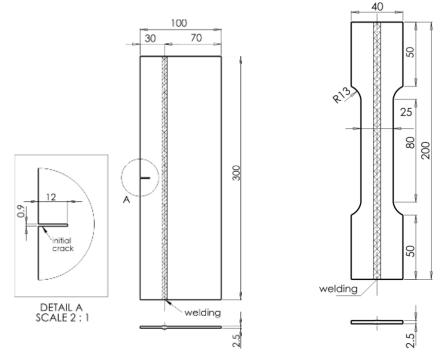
The surfaces of the specimens were machined off and the specimen dimensions.
